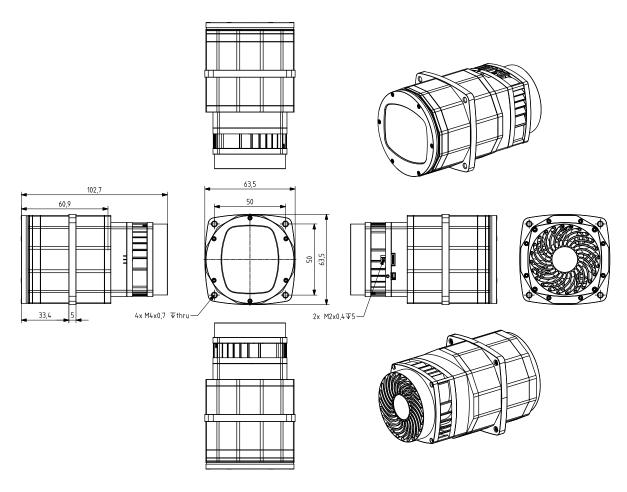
Dimensional drawing of MJ150XR-GP-TP2:1-G0
